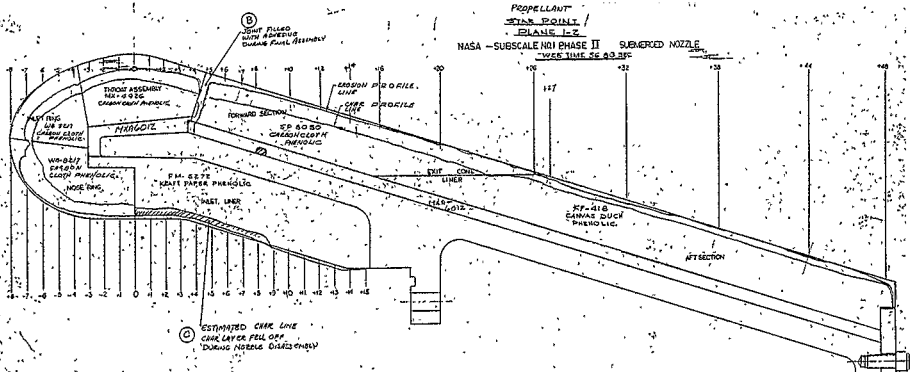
Nozzle No. 1 Submerged Liners Sectioned at Plane 2-3
